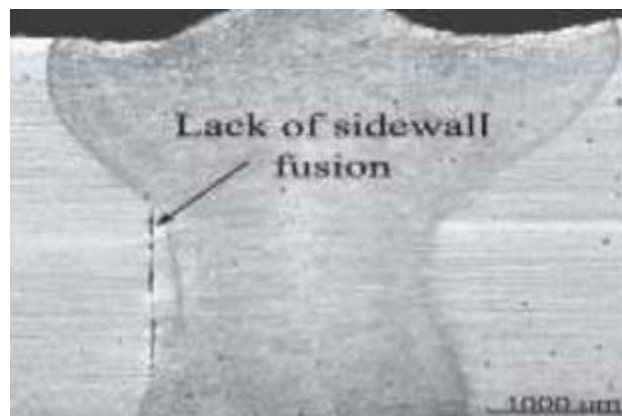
Incompletely Filled Groove or Incomplete Penetration
